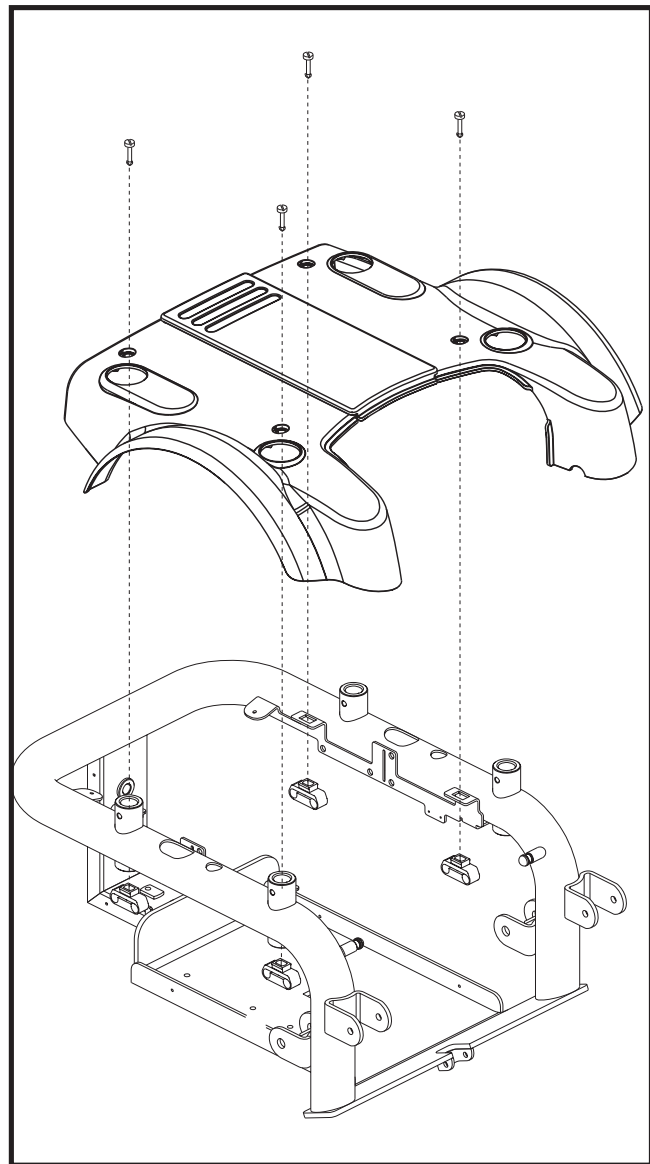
Jazzy 1121 Shroud Removal/Assembly
